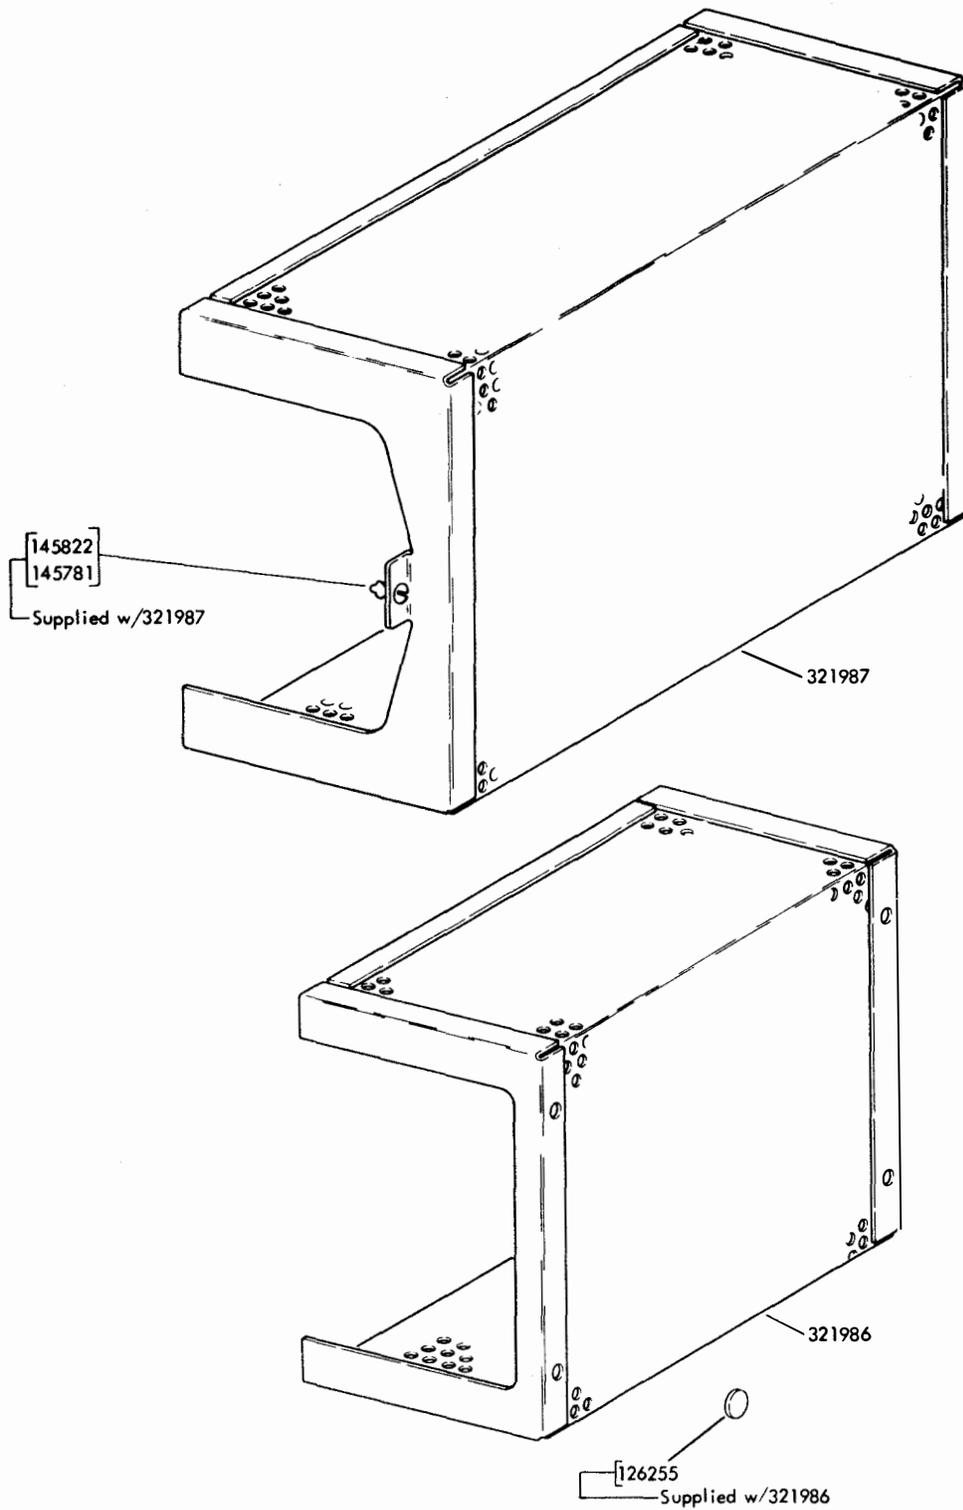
Electrical Service Assembly Covers (Sheet 1 of 2)
